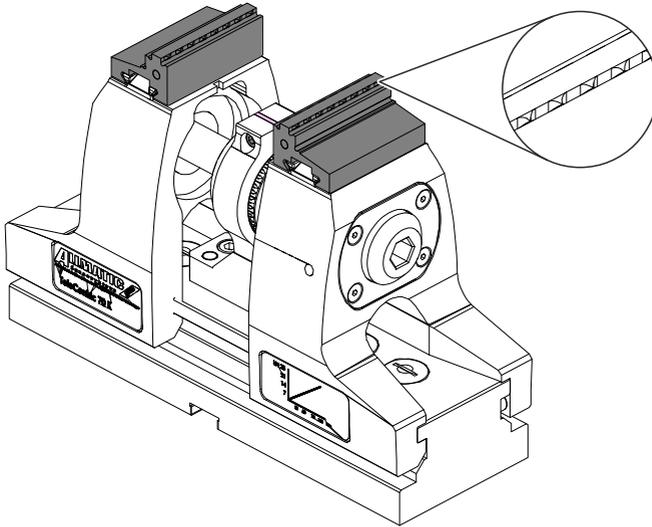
Clamping jaws for conventional clamping with a smooth surface
